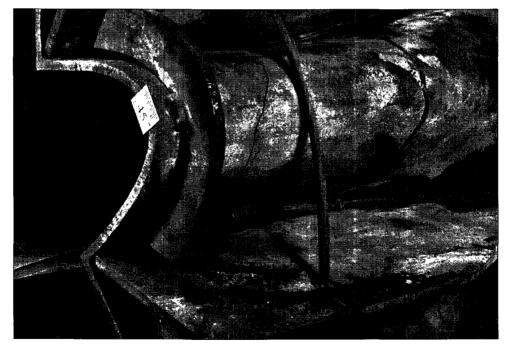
Additional views of outside diameter surfaces of burner tip.
